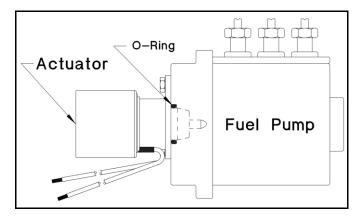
Mounting of 0200 Actuator to Fuel Pump
